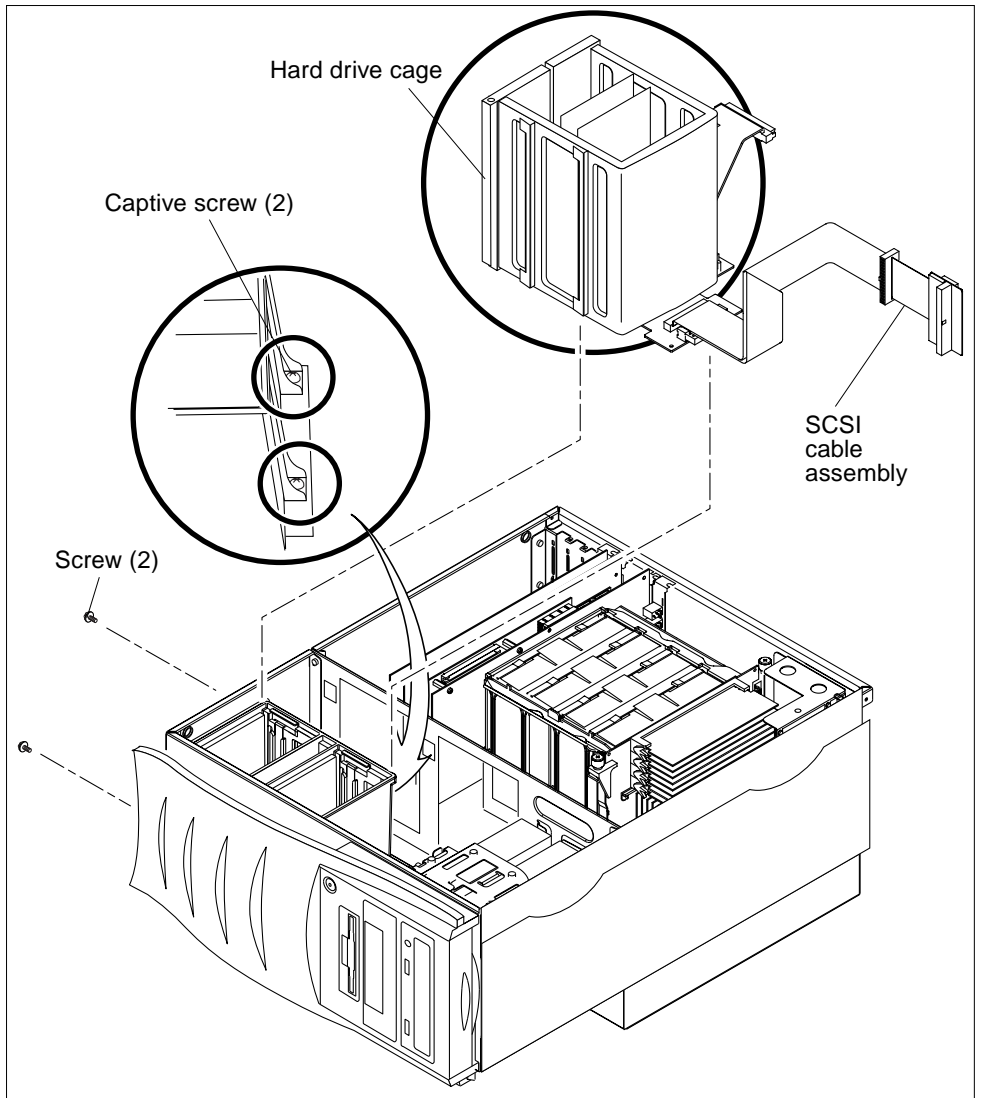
Removing and Replacing the Hard Drive Cage (Sheet 1 of 2)
